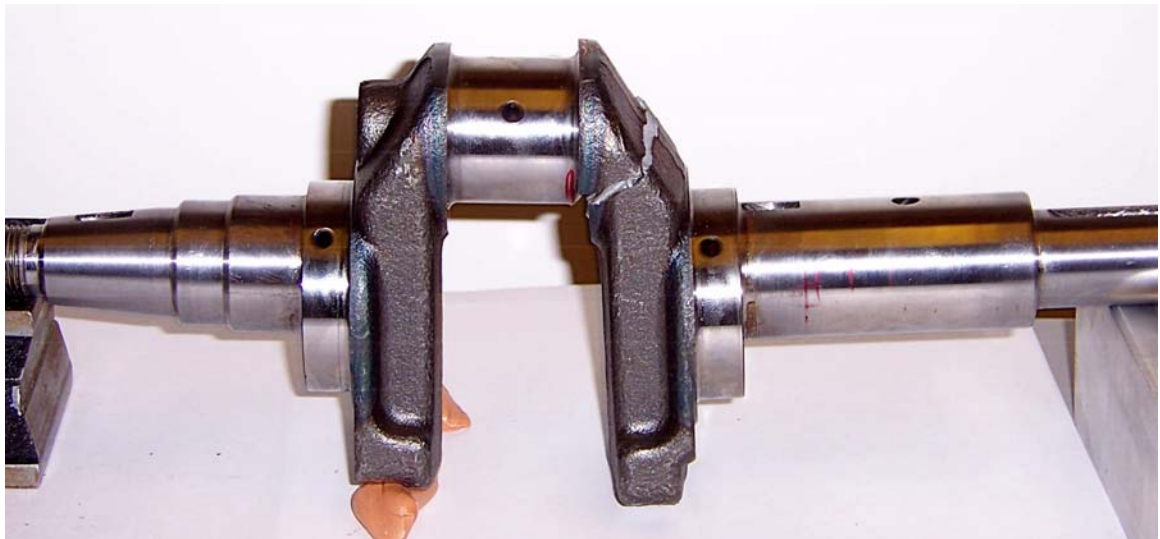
Side view of typical fatigue fractured forged steel crankshaft.
